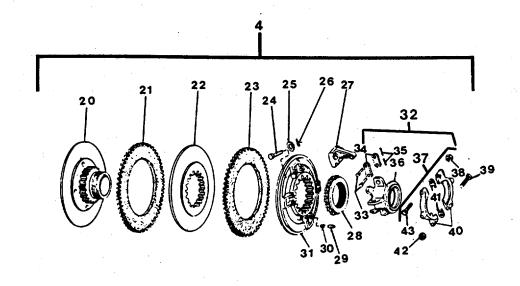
Friction Clutch Assembly Repair (Sheet 2 of 2).
